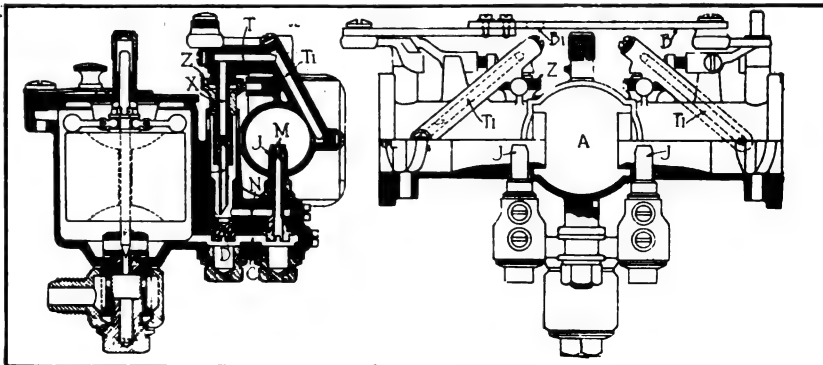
Longitudinal Sectional View of New Zenith Carburetor at Left; at Right, Illustrating Duplex Mixing Chambers and Dual Jets.
